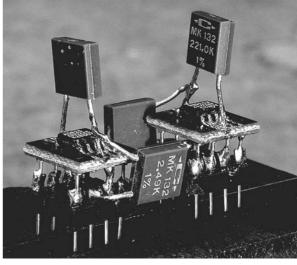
Two views of the AD825AR op-amp modules using Caddock MK132 resistors. The SOIC chips must be soldered to an Aries DIP adapter. Otherwise, construction is similar to Photo 28 in Part 3 of the original series.
